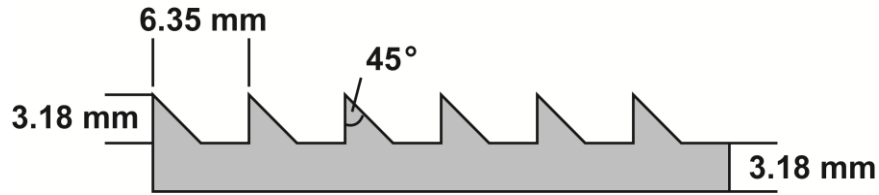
The dimensions of the finned surface used for testing the contact switch
